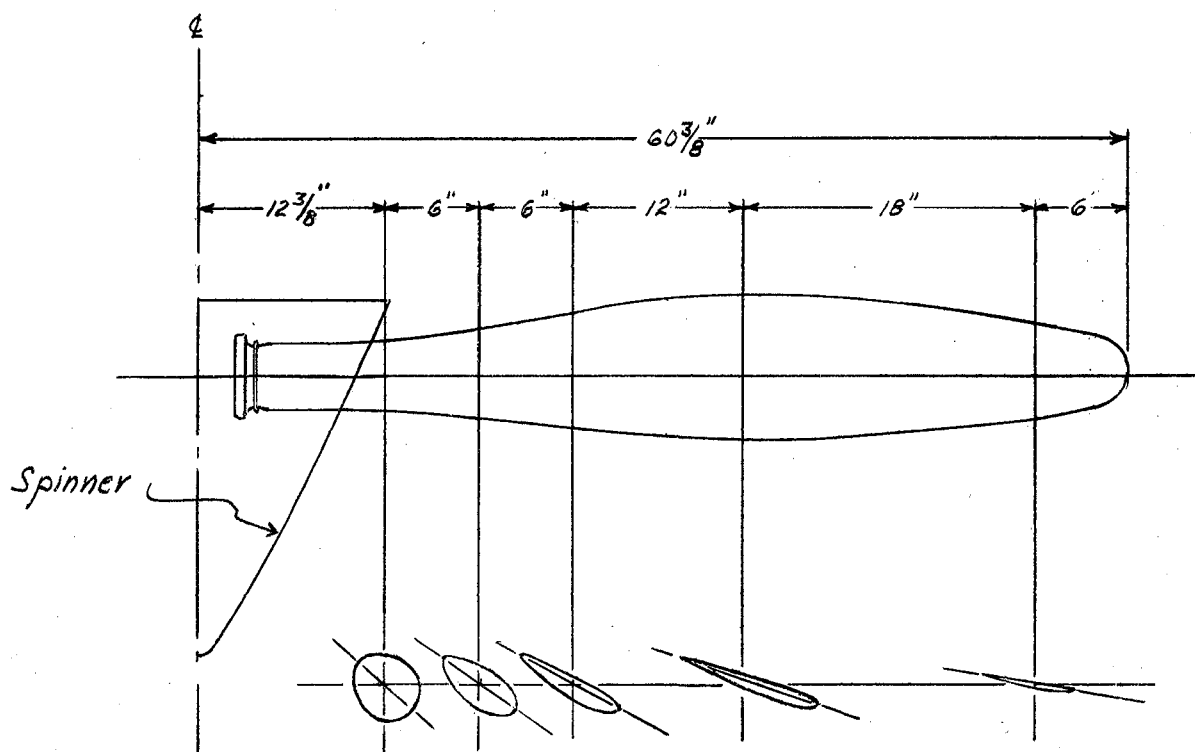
Developed plan form and blade sections. Hamilton Standard 3155-6 blade.
